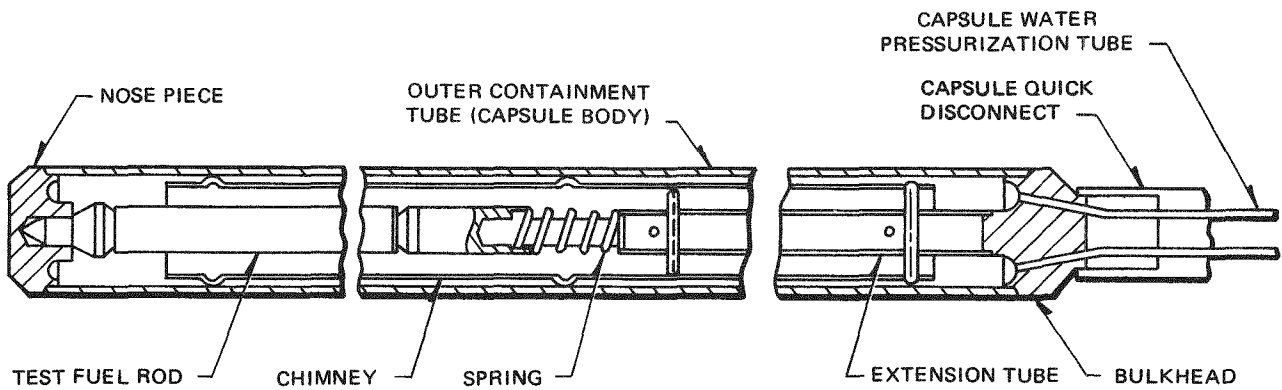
GETR Pool Fuel Test Capsule Assembly
